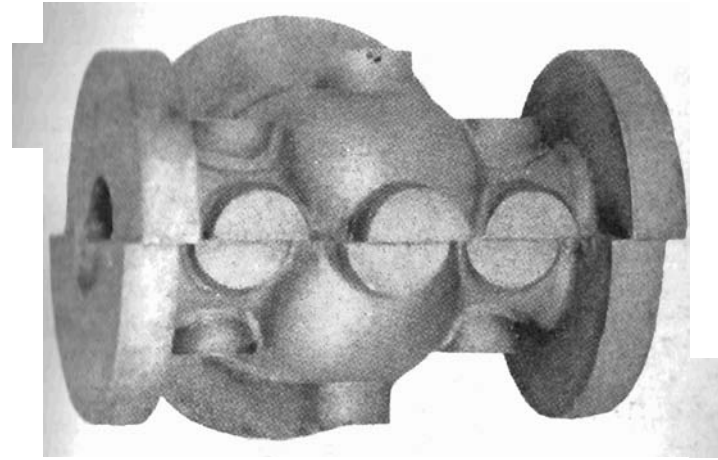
A crossjoint in a large grey-iron valve body casting produced by mismatch of the top and bottom parts of the mould.
